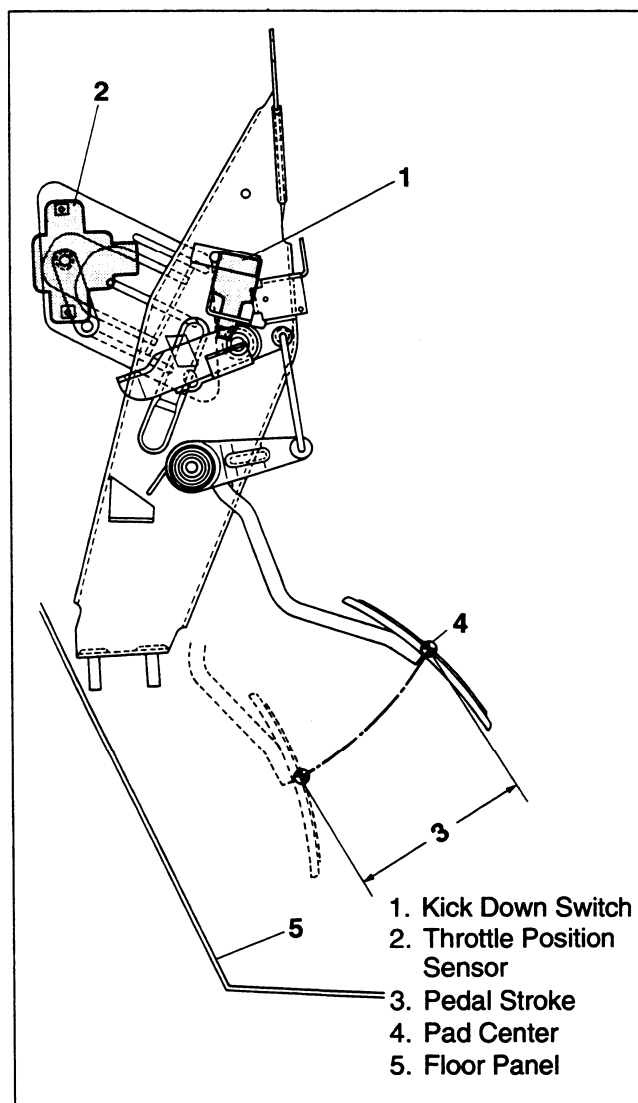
Kick Down Switch, Throttle Position Sensor and Related Part
